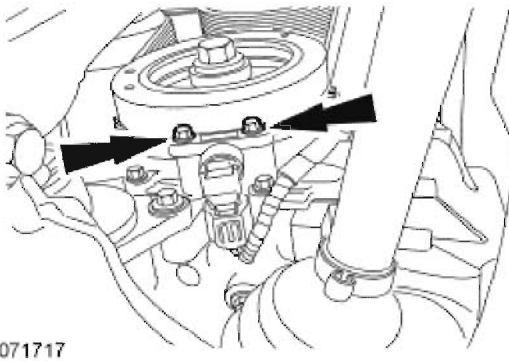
Aligning Crankshaft Pulley Bolt Holes
